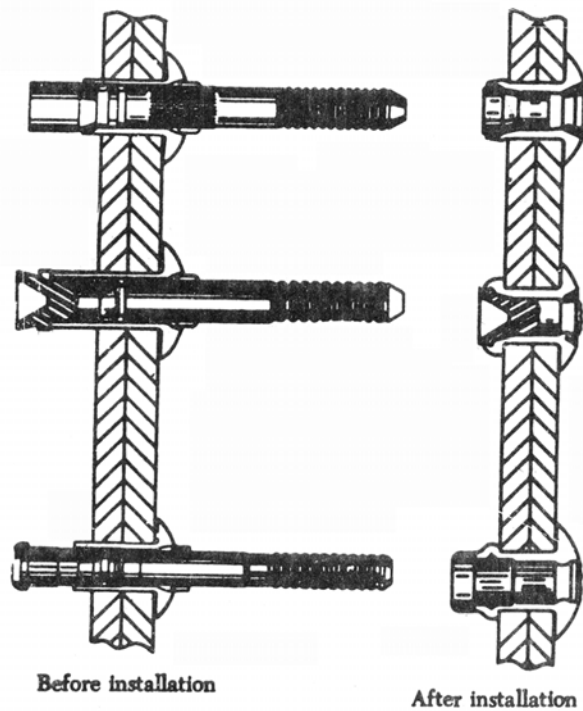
, Self-plugging (mechanical lock) rivets.
